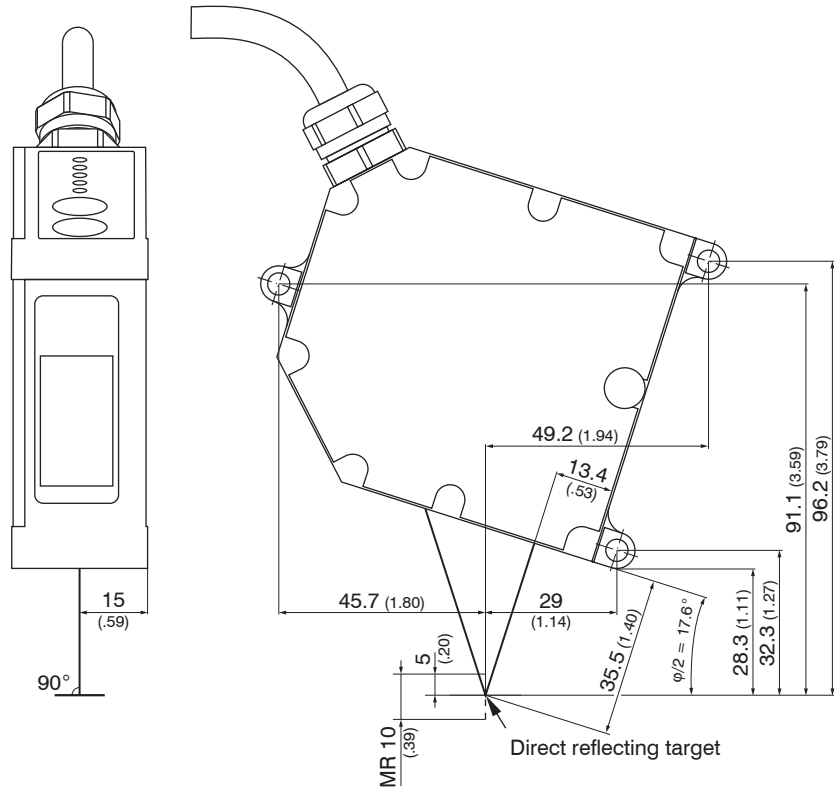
Dimensional drawings optoNCDT1700-10DR, dimensions in inches, not to scale
